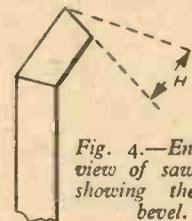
Enlarged view of saw-tooth showing the top bevel.
